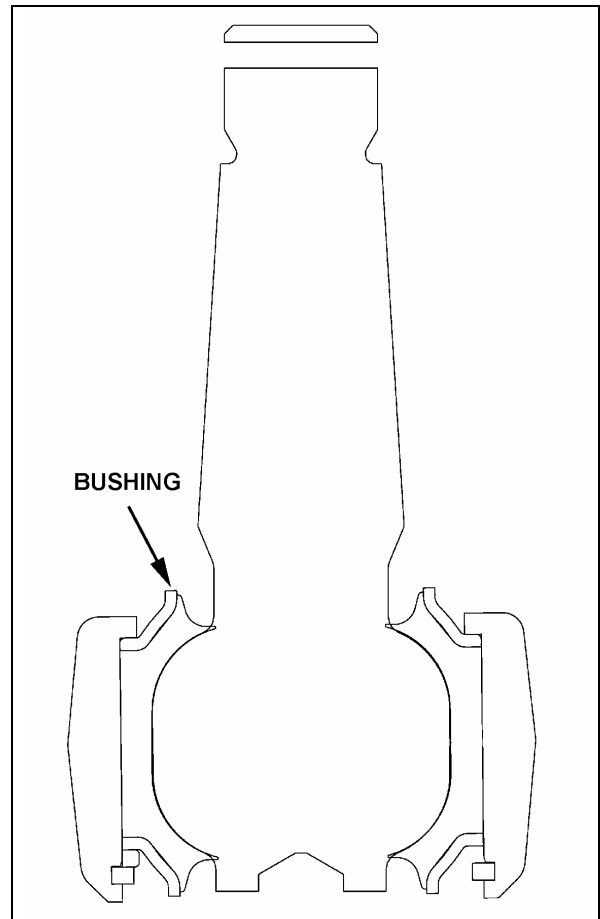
LOWER A-ARM CENTRAL BALL JOINT 16113
